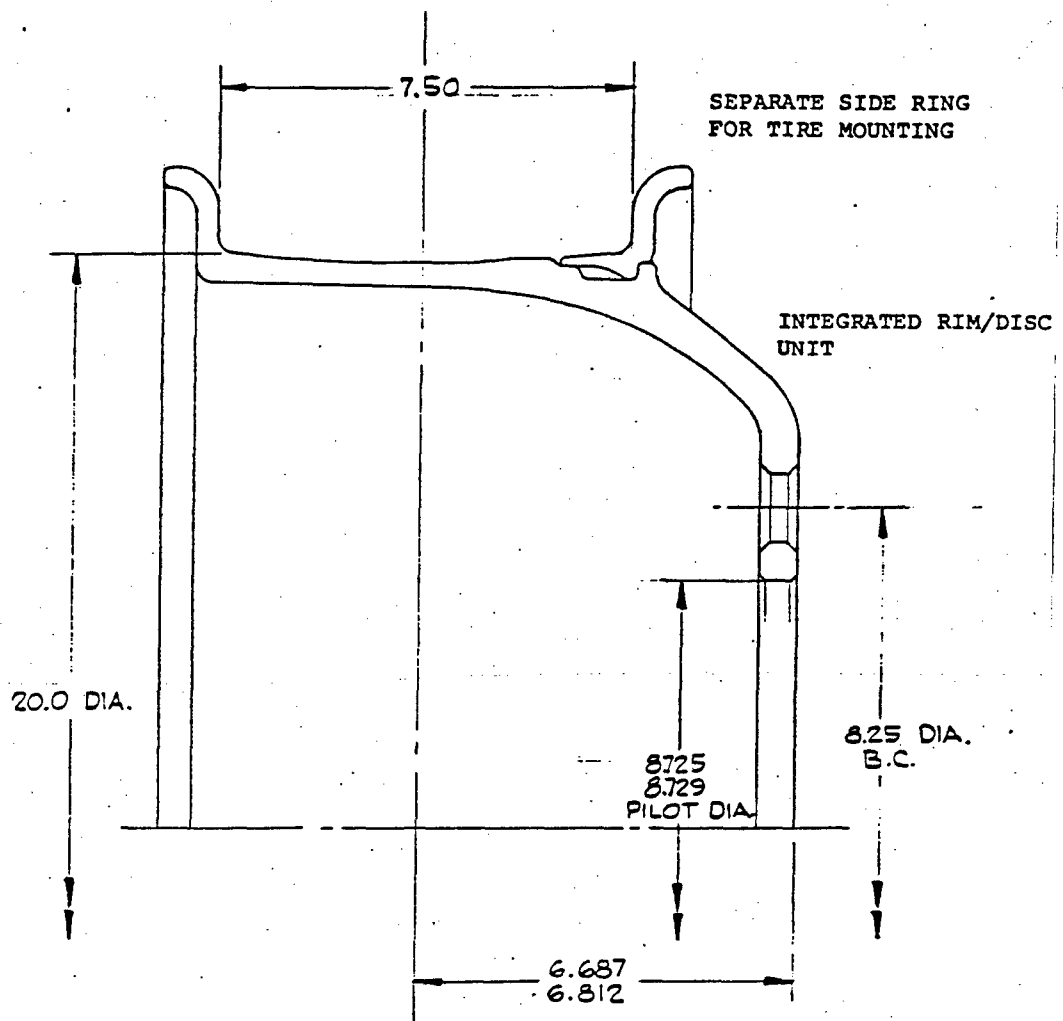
Composite Wheel Assembly (20 x 7.5 In. Wheel)
